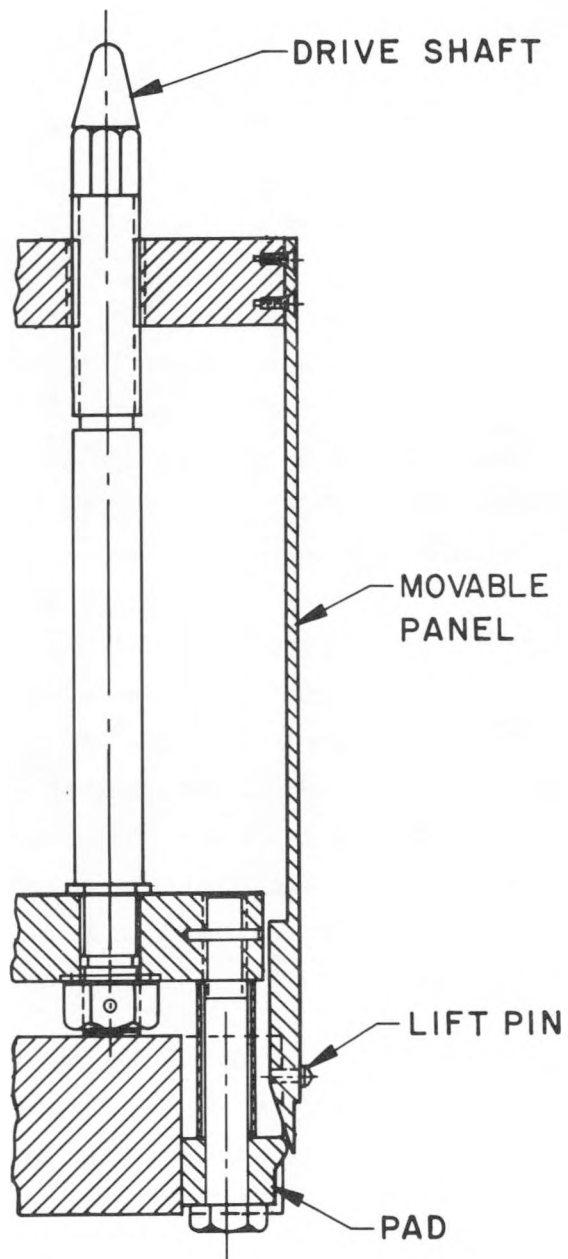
Blanket Guide Tube Extension/Stub Tube Lifting Tool Detail
